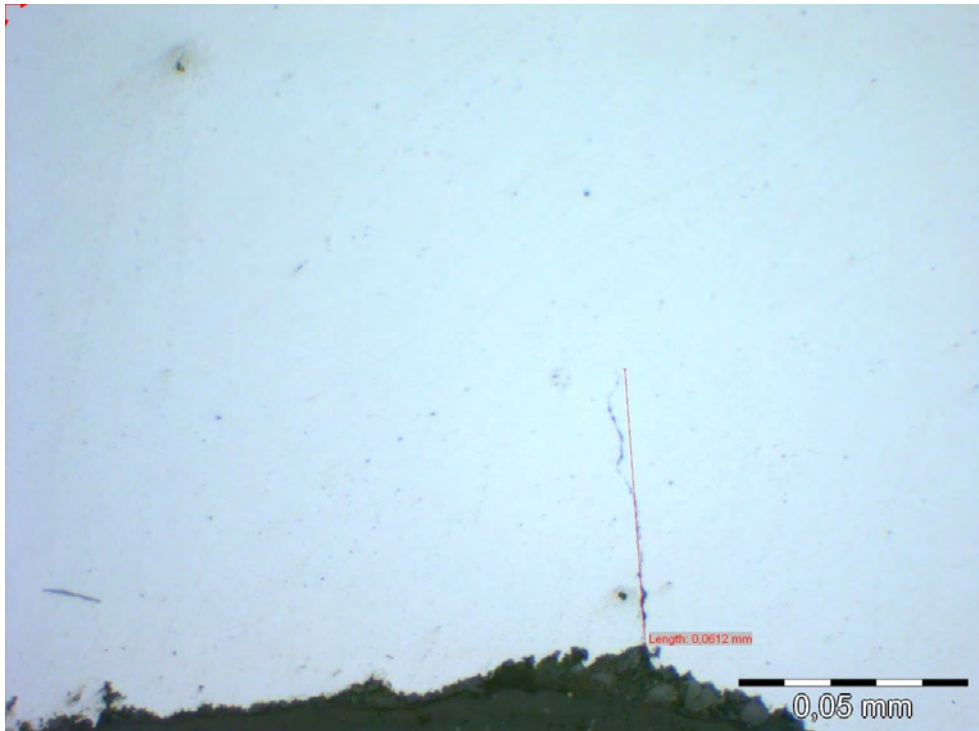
Cut three in crack at segment A, second ridge on barrel no. 14389
